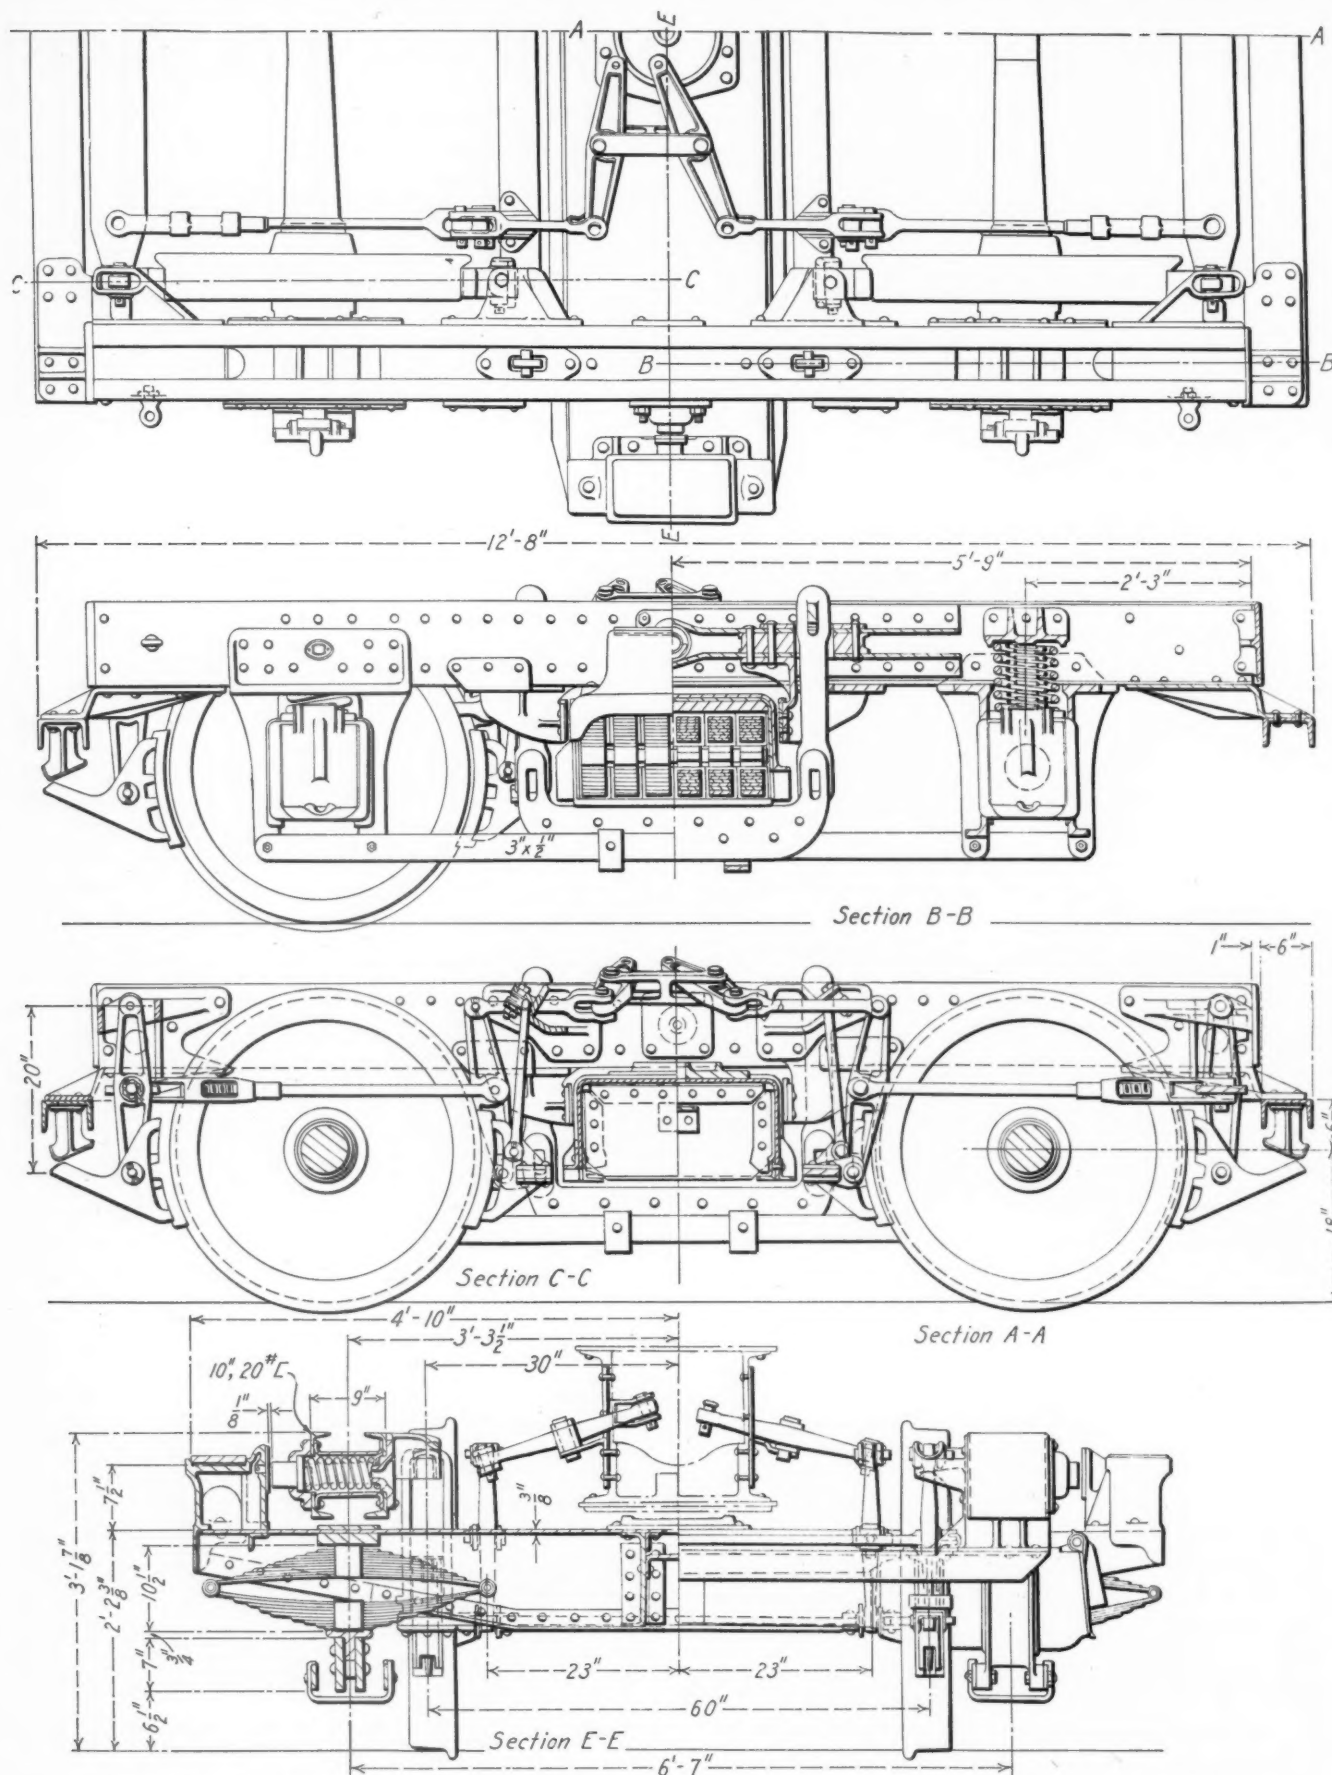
Original Four-Wheel Steel Passenger Car Truck with Clasp Brakes Applied; Pennsylvania Railroad
